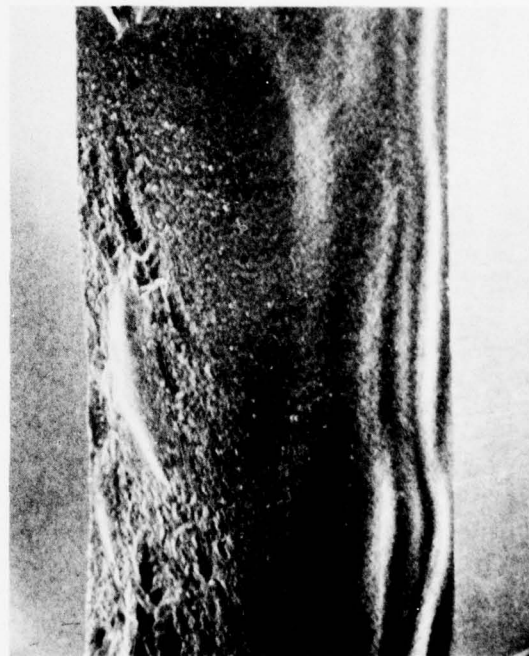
Fracture Surfaces of NC-132 Specimen 21
